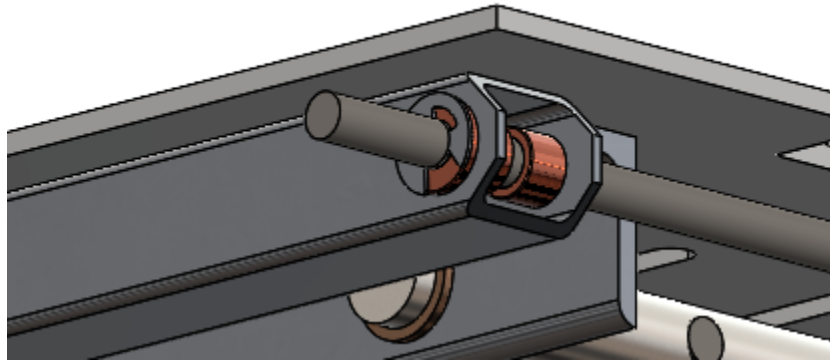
The 1/4" retaining ring assembled to the angle shaft.
